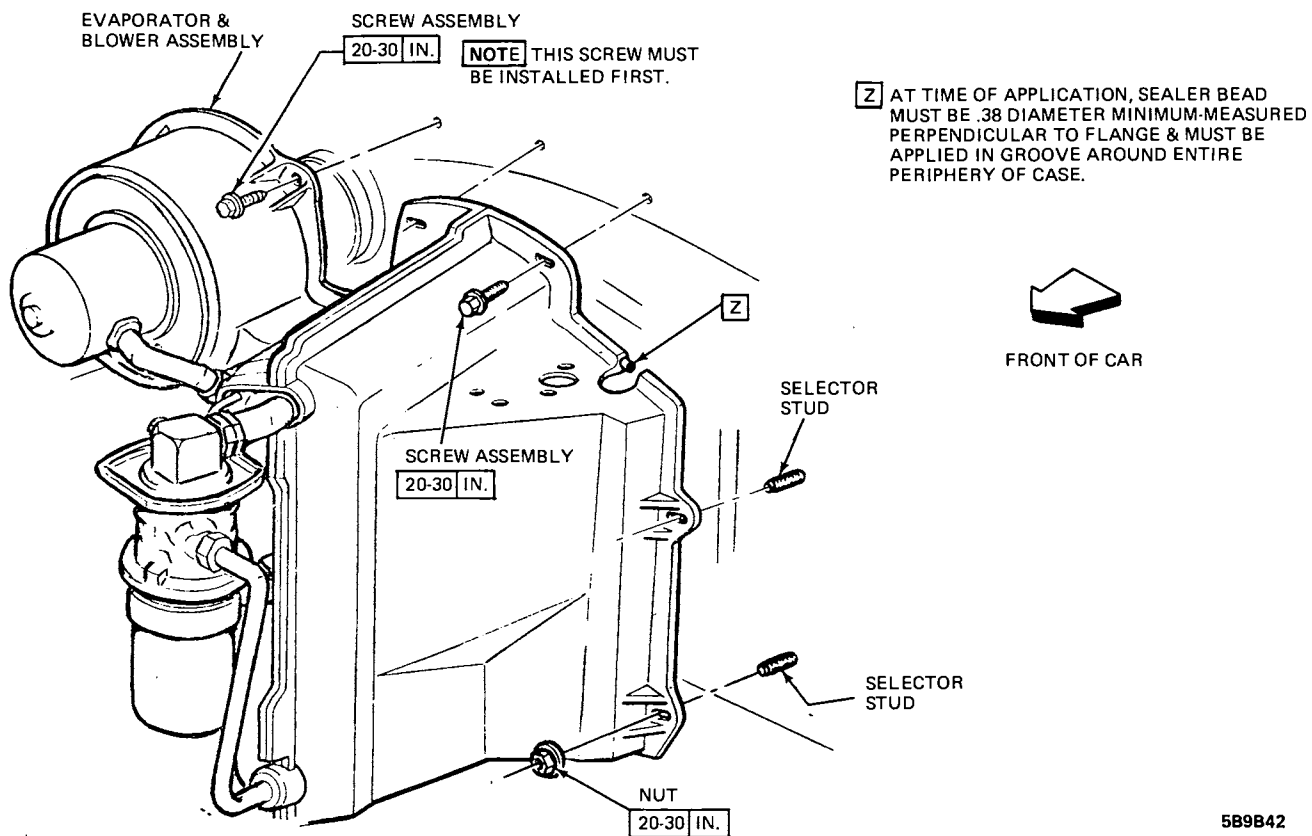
B-134 - Evaporator and Blower Assembly - X Series
